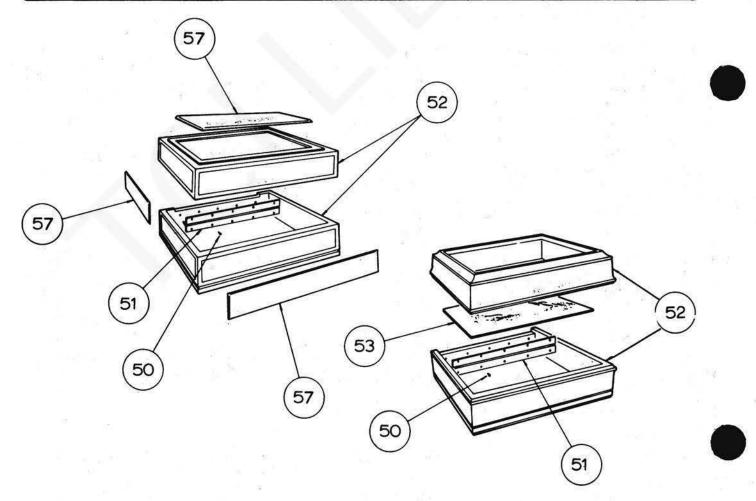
Decorative Chest - Assembly of Parts (Table L)
